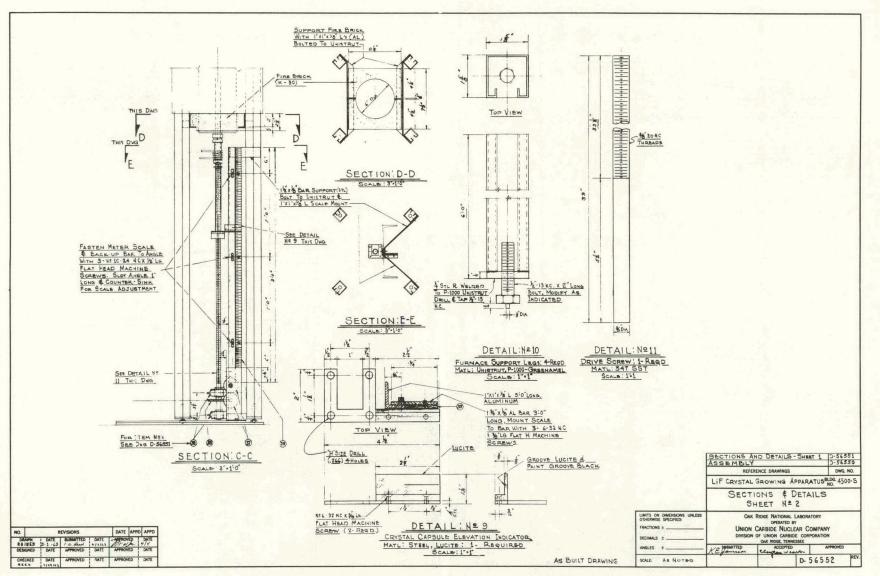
LiF Crystal Growing Apparatus: Sections and Details, Sheet No. 2.
